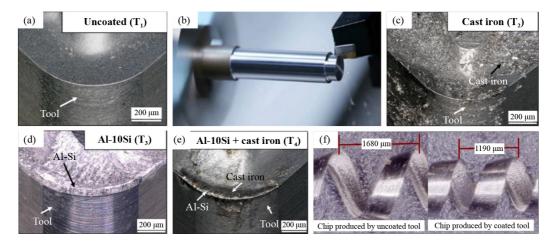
Effect of coating on tool wear and chip [36]: (a) uncoated tool, (b) premachining of tool, (c) cast iron-coated tool, (d) Al-10Si-coated tool, (e) Al-10Si- and cast iron-coated tool, and (f) chip morphology.  $T_1$ : uncoated tungsten carbide,  $T_2$ : tool premachined with cast iron,  $T_3$ : tool pre-machined with Al-10%Si,  $T_4$ : tool pre-machined with both Al-10%Si and cast iron. Reproduced with permission from Ref. [36] from Elsevier.
